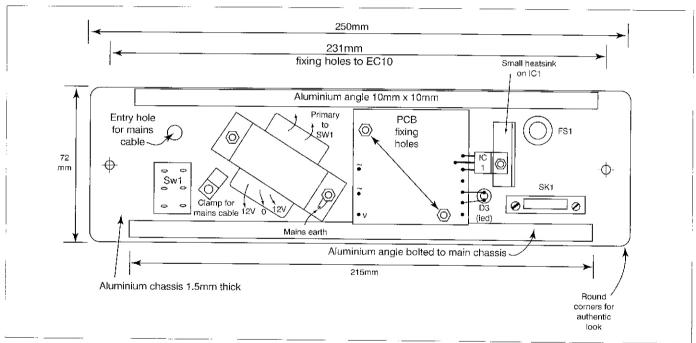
General arrangements of the PSU components and chassis dimensions.
